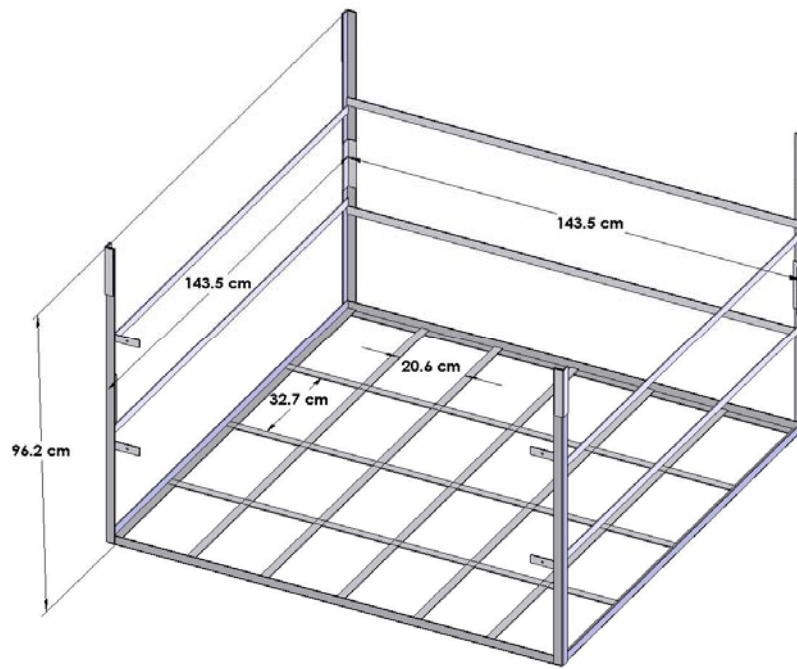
3/8 Scale Model Supporting Frame, Walls and Floor
